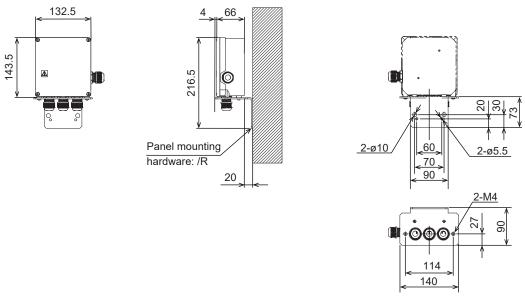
Installation of rack or wall mounting hardware (/R) on the terminal box B
